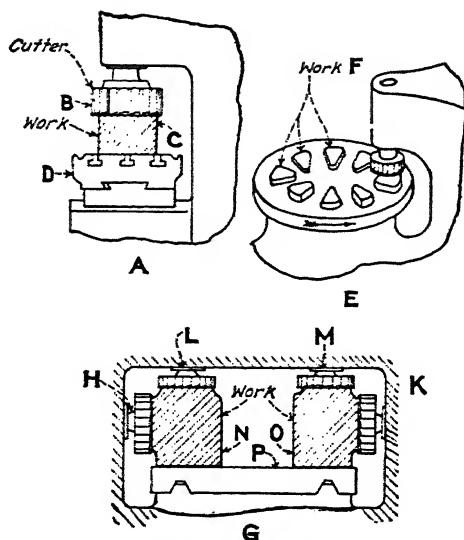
Vertical, Continuous and Multi Spindle Milling Machines
